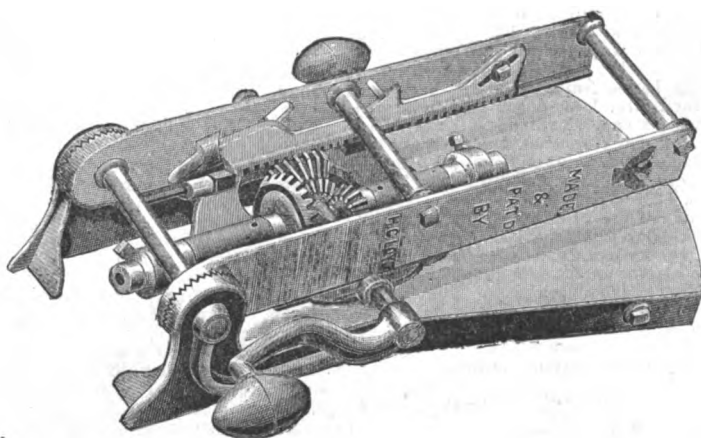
The Boss Two-Speed Boring Machine, Folded.
